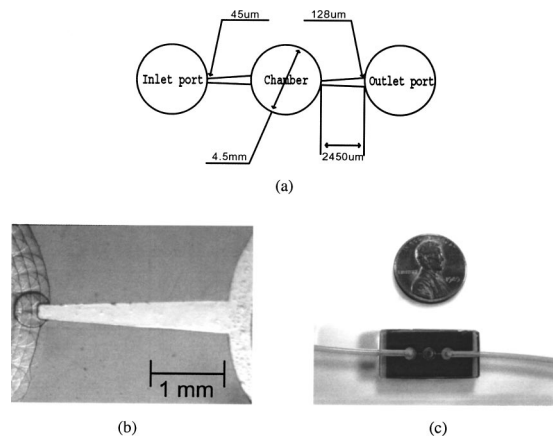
(a) Schematic of the pump in a top view, (b) the laser fabricated diffuser of the pump, and (c) the assembled pump.
